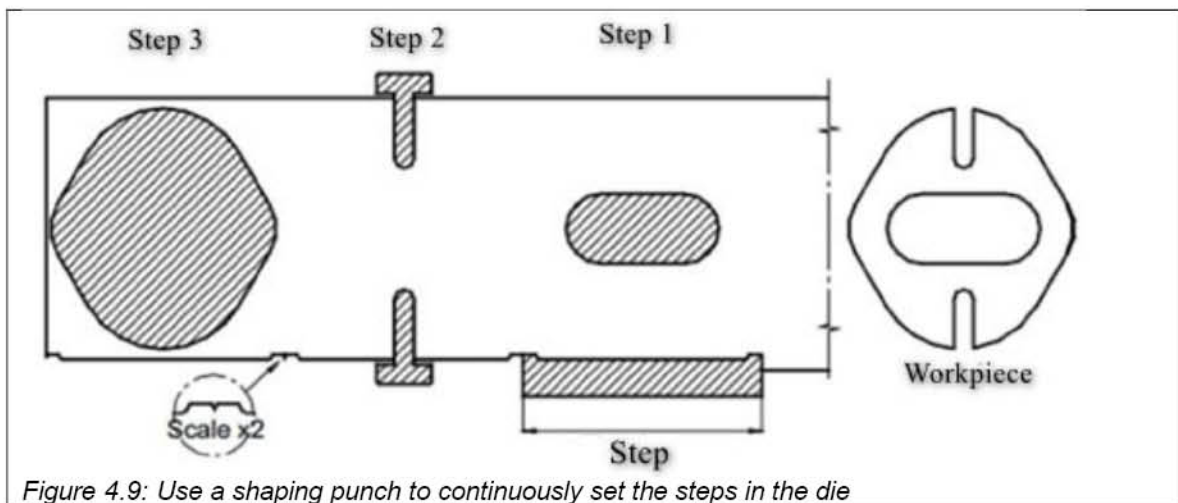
Use a shaping punch to continuously set the steps in the die
